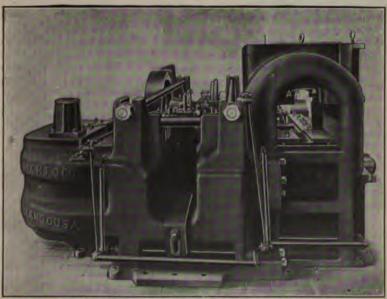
Six-inch Ajax Universal Forging Machine used in the C. & N. W. Railway Shops for making the Forged Parts shown in Fig. 25
